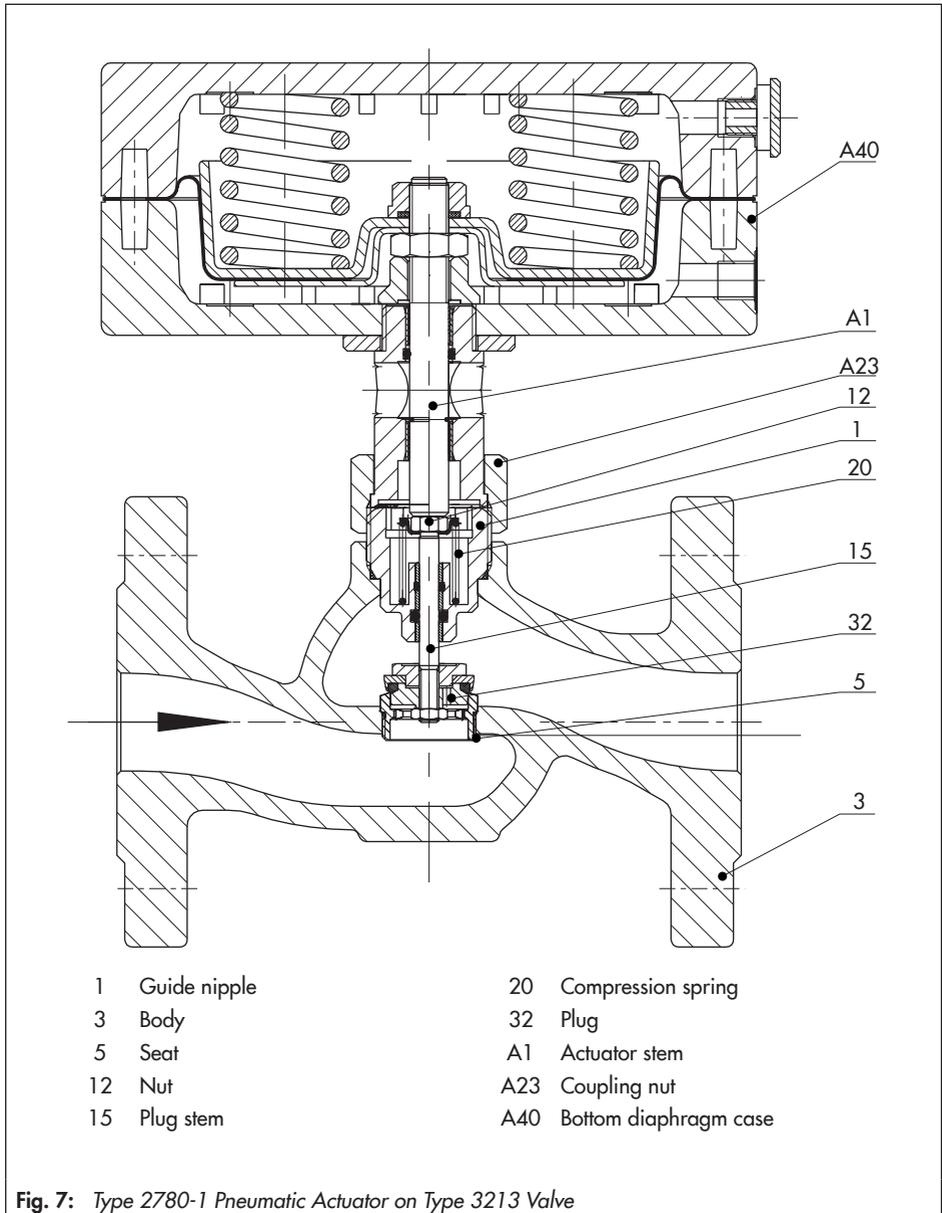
Type 2780-1 Pneumatic Actuator on Type 3213 Valve
